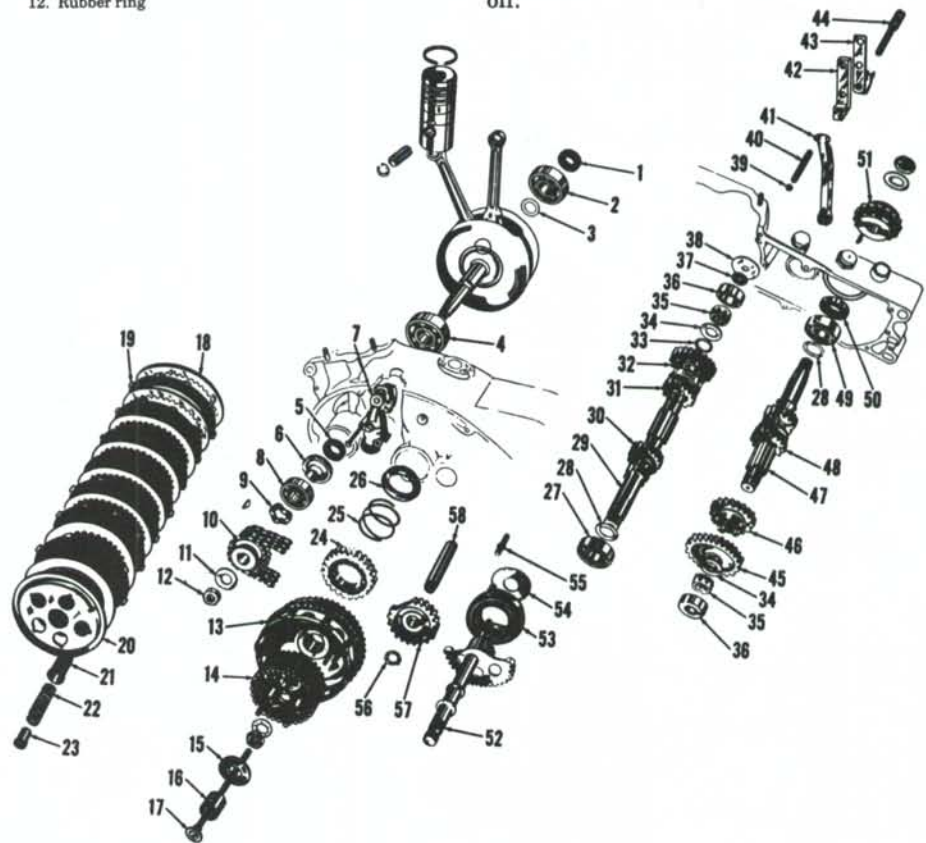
Exploded view of 250cc engine and transmission. Other models are similar. Shift mechanism is shown in Fig. A3-11.
